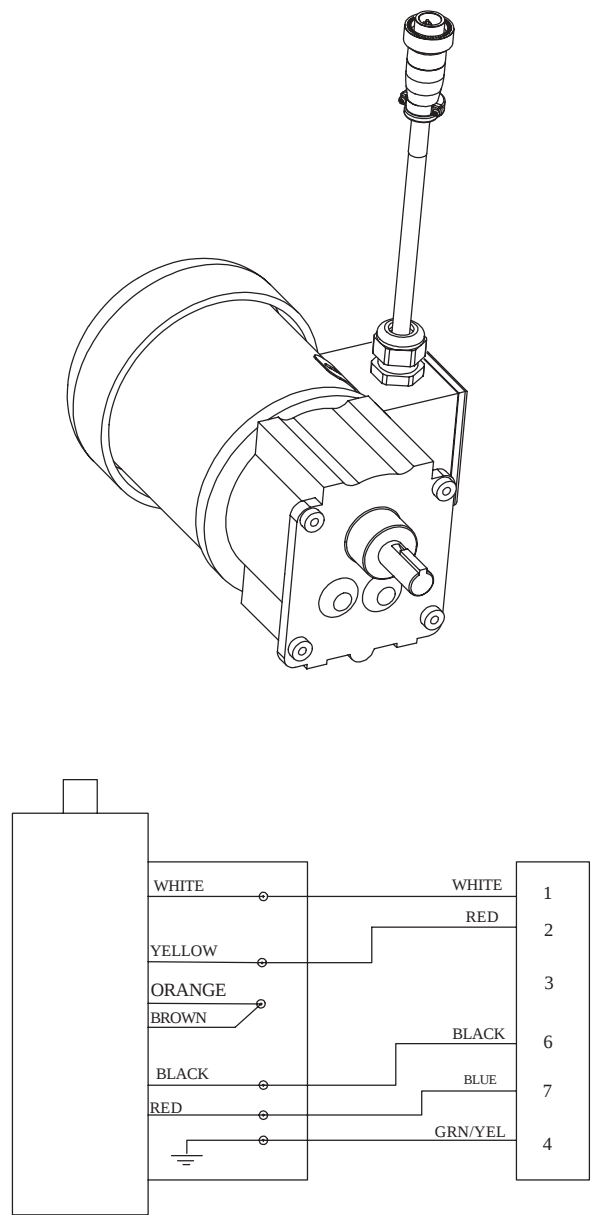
1/6 and 1/4 hp motor service kit parts
